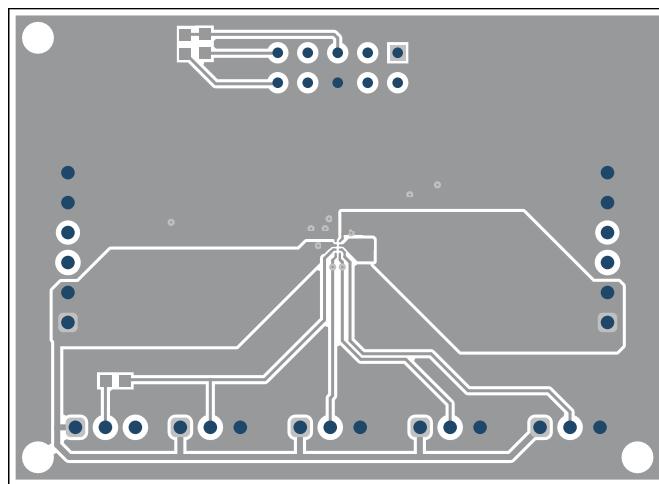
TPS6286x0EVM PCB - Top Layer
